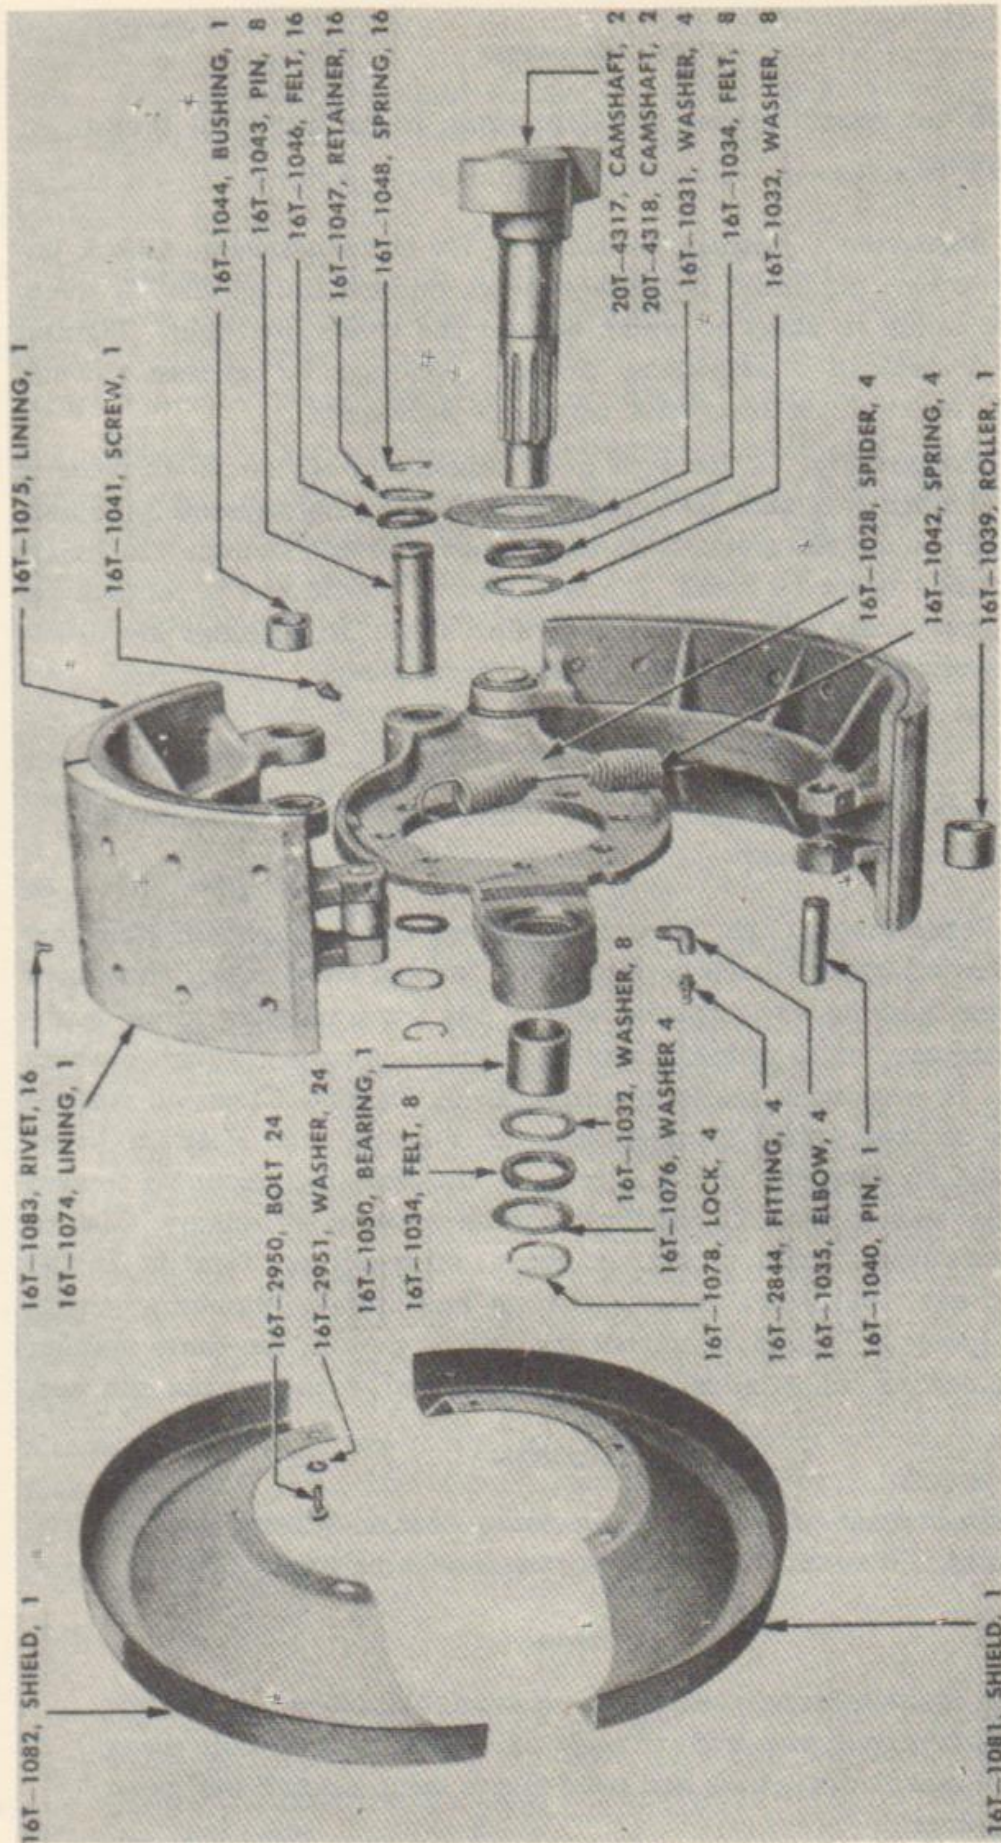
SEMITRAILER INTERNAL BRAKE ASSEMBLY—EXPLODED VIEW
